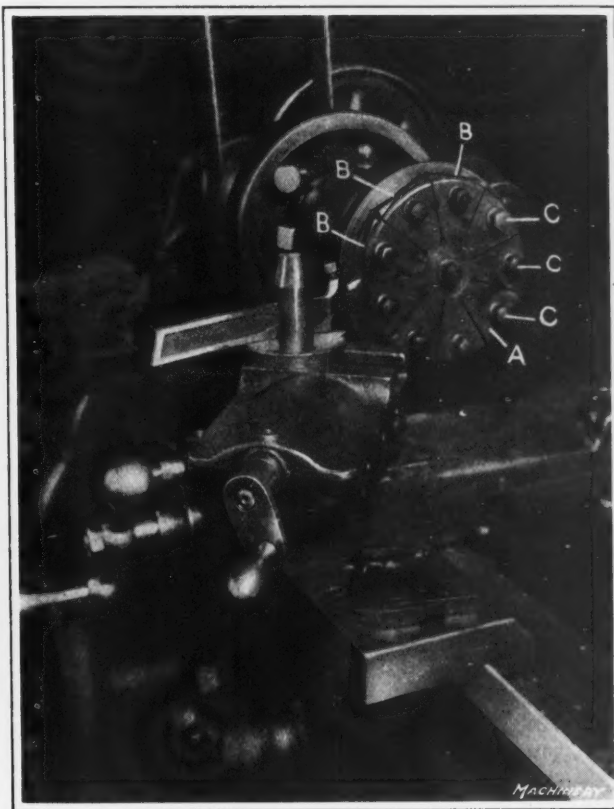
Turning Toolpost Swivel Blocks from Bar Stock, using Fixture having a Capacity for Nine Pieces
